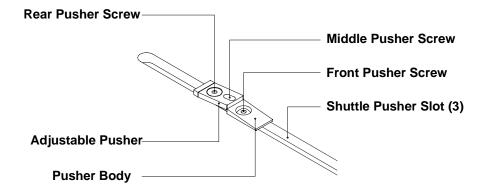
Rear pusher details indicating the location of the various adjustment points.
